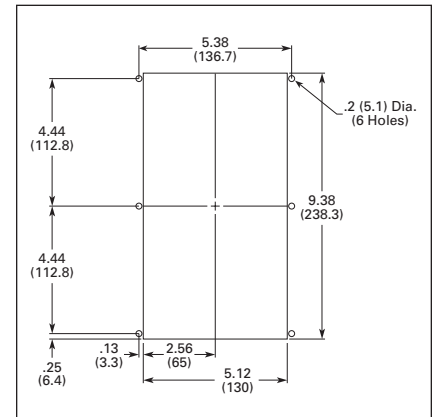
Chassis Cutout Dimensions in Inches (mm)
